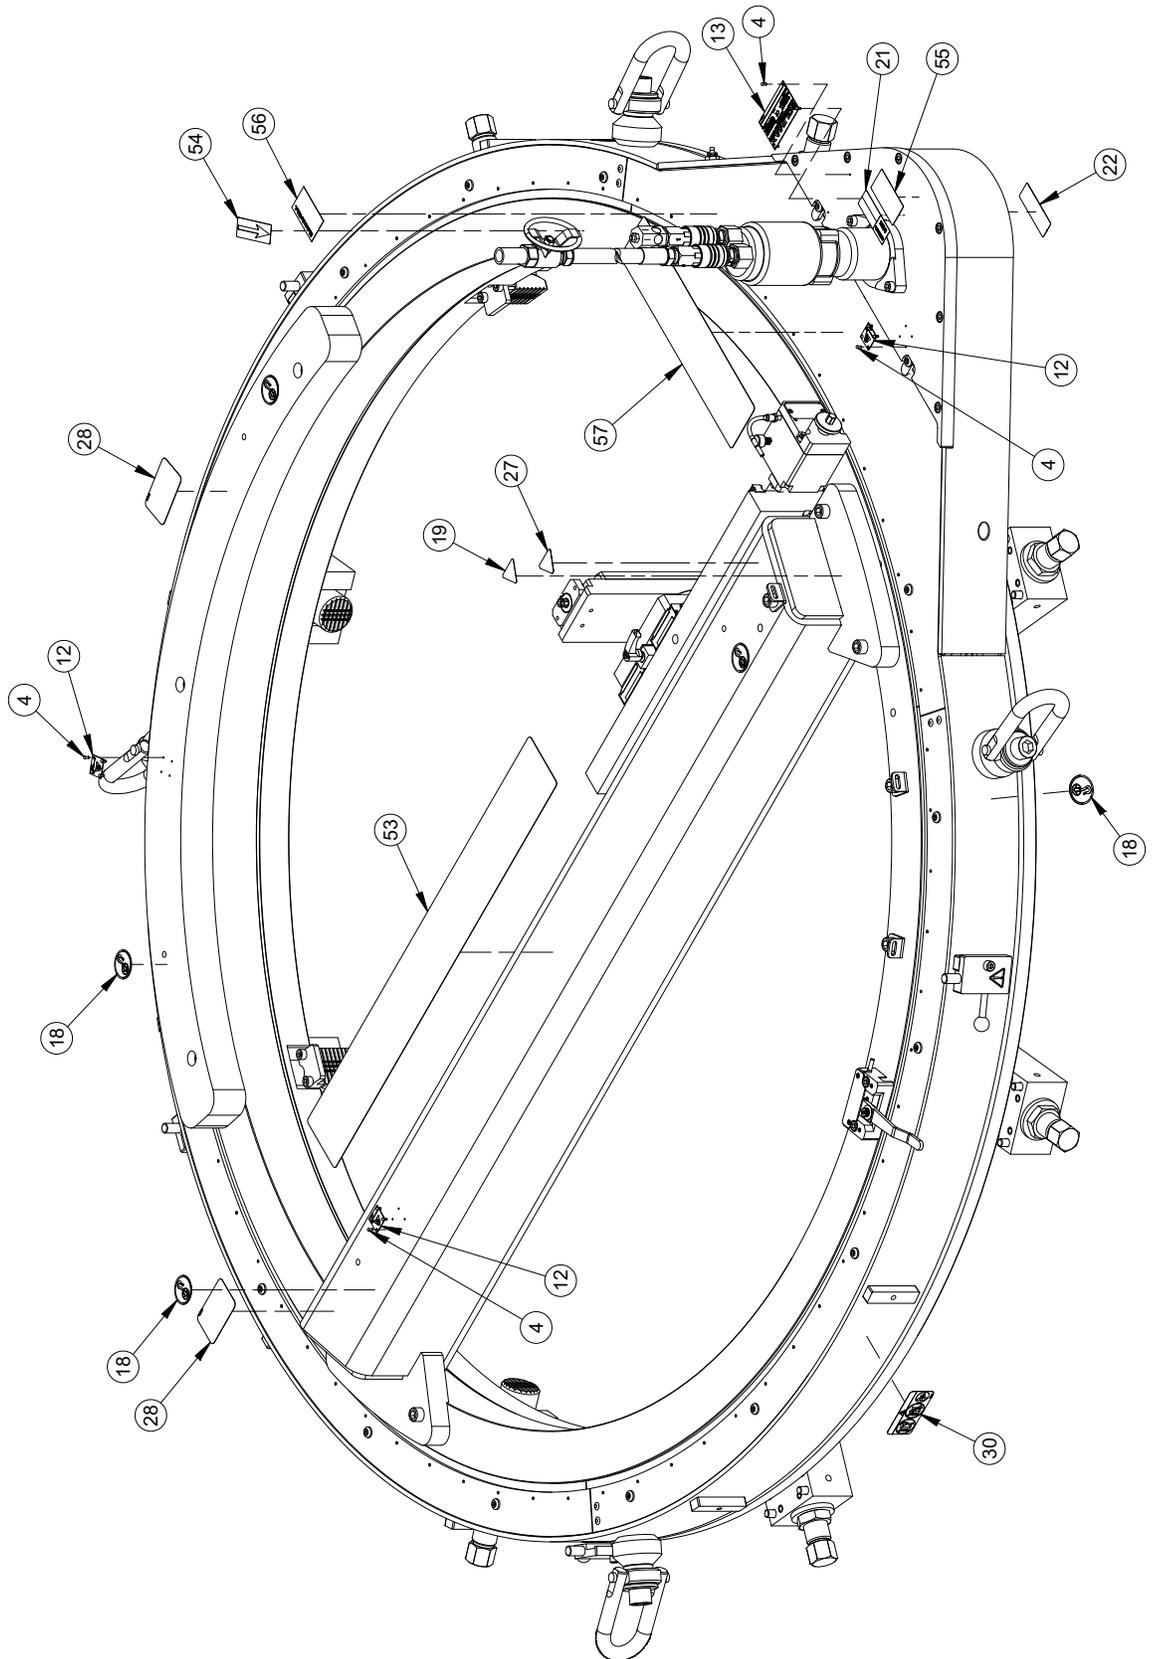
ODF60 SPEED FACER EMBLEM PLACEMENTS (REF. 86990)
